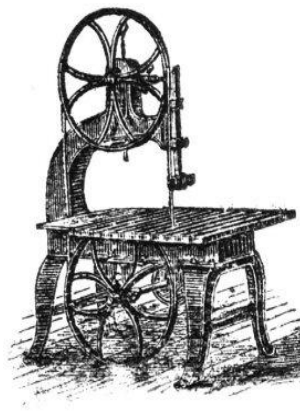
NEWBERRY'S BAND SAWING MACHINE, PATENTED 1808.
